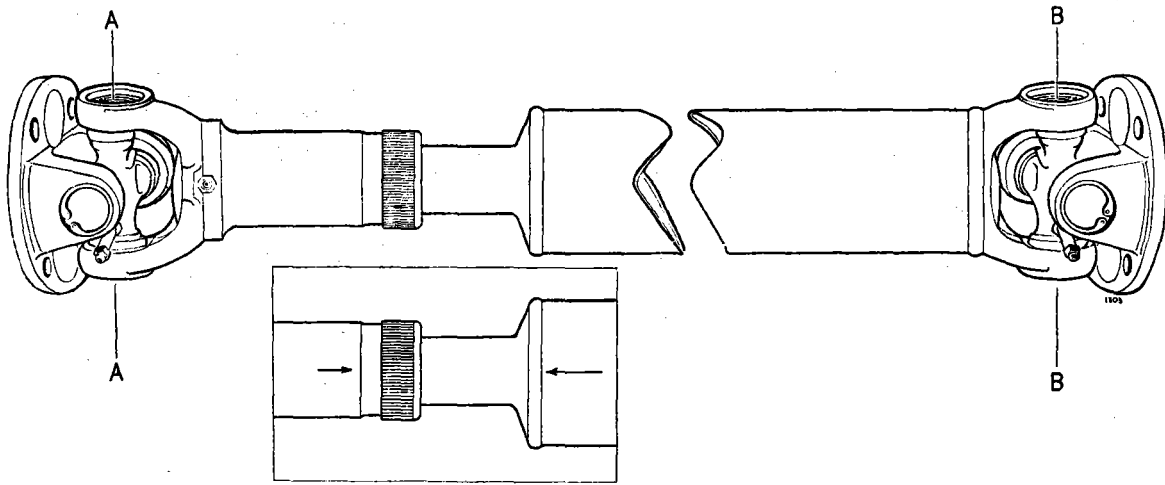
When refitting the sliding joint to the drive shaft it is ESSENTIAL that the yokes A and B are in the same plane. The inset shows the arrows that are stamped on the two parts to facilitate alignment.
